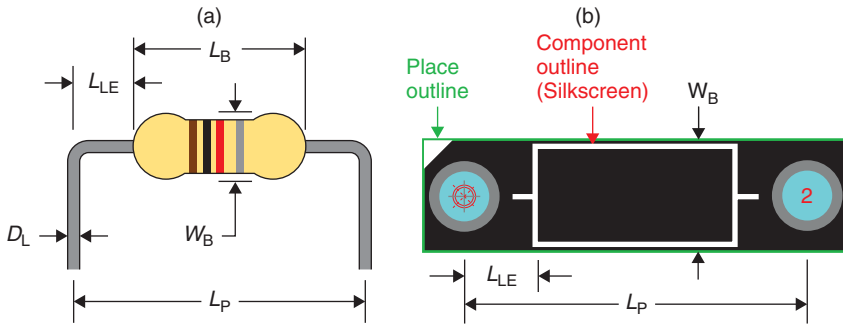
Generic footprint design parameters for axial-leaded components. (a) Radial-leaded resistor. (b) Layout radial footprint
